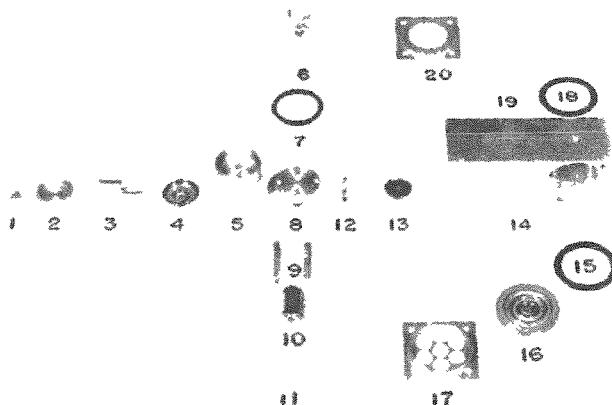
Pressure Recorder Disassembled Showing Components. (1) spring hub; (2) spring cup; (3) rotor; (4) spring; (5) motor housing; (6) end plate; (7) "O" ring; (8) motor housing cover; (9) relay support rods; (10) relay; (11) relay support plate; (12) release arm; (13) recording disc; (14) recorder housing; (15) gasket; (16) diaphragm and stylus; (17) diaphragm retainer; (18) gasket; (19) inspection port; (20) port retainer.
